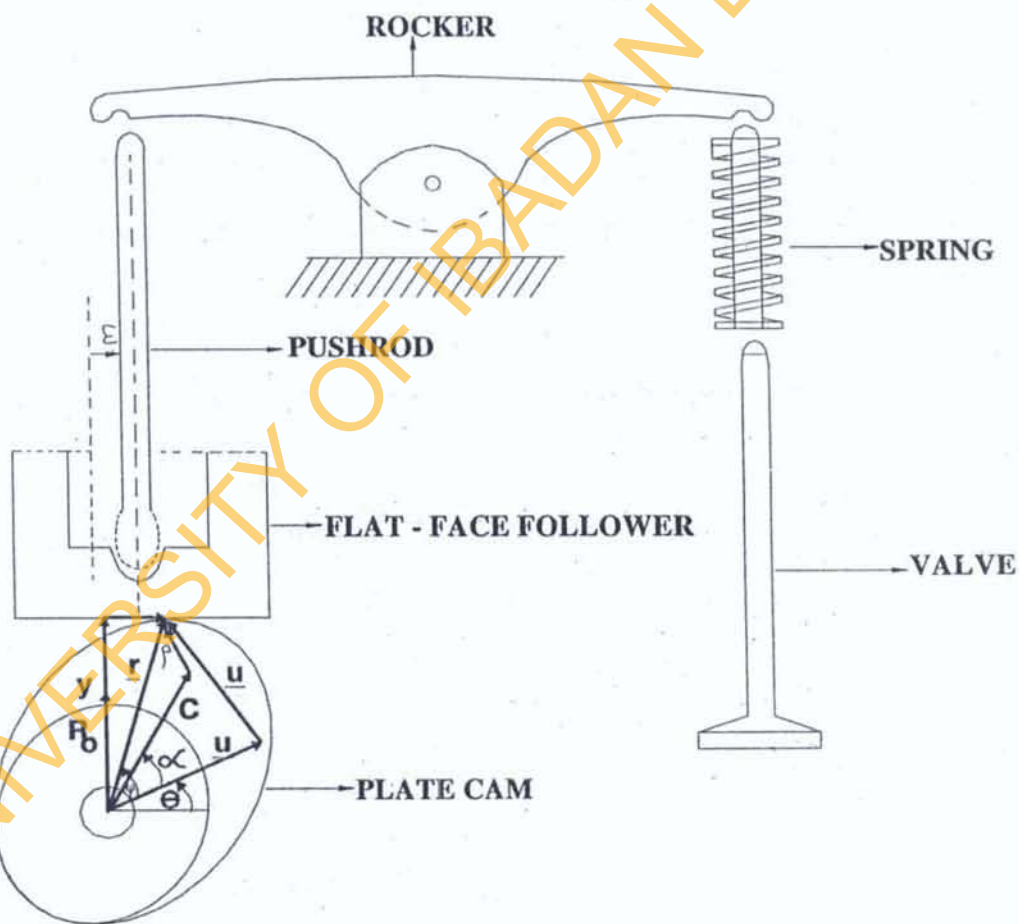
Cam and Follower for Reciprocating Internal Combustion Engine at Point of Contact
